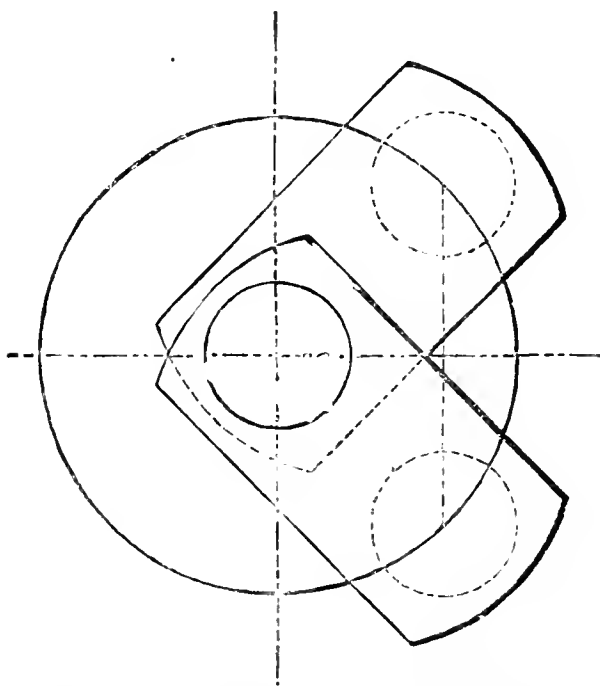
Position of the Cranks for testing the Valves and Pistons.
